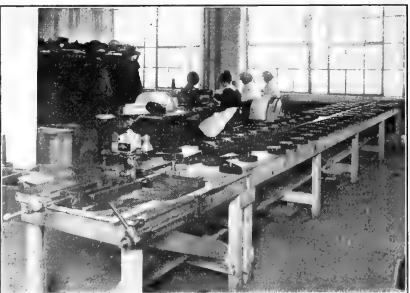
AUTOMATIC MACHINE FOR CUTTING ELASTIC HARNESS TAPE.
